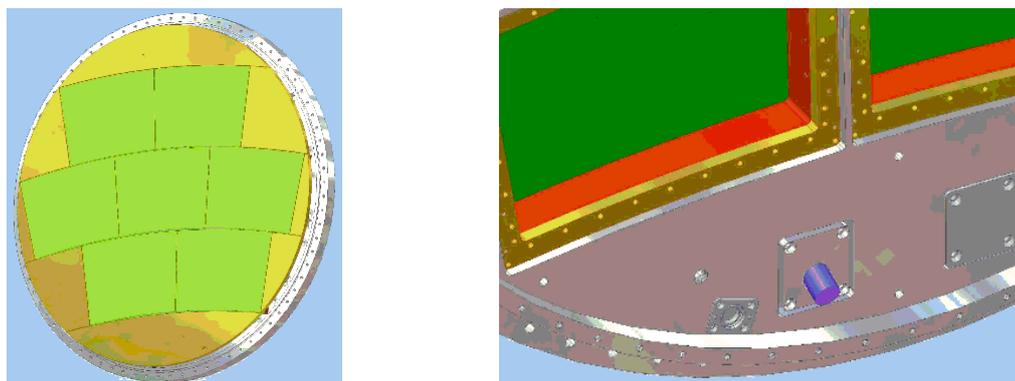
Left: Design of the large prototype endplate. Right: Detailed view of the endplate with some auxiliary connections and mountings for calibration system.
